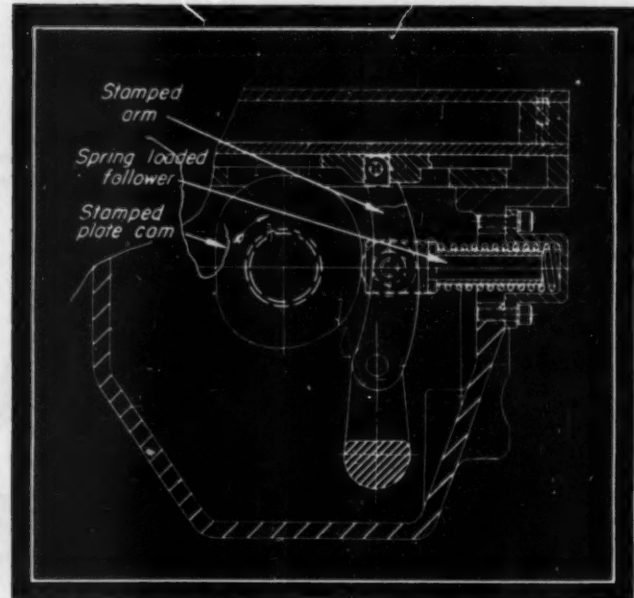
Production design of tucking unit has stamped plate cam and stamped arm with spring-loaded follower
